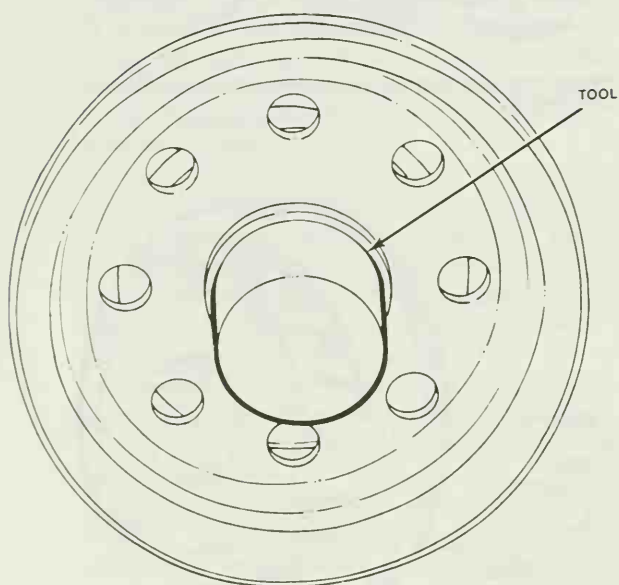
Installing the clutch hub in thrust bearing and cover. (American Motors Corporation)
